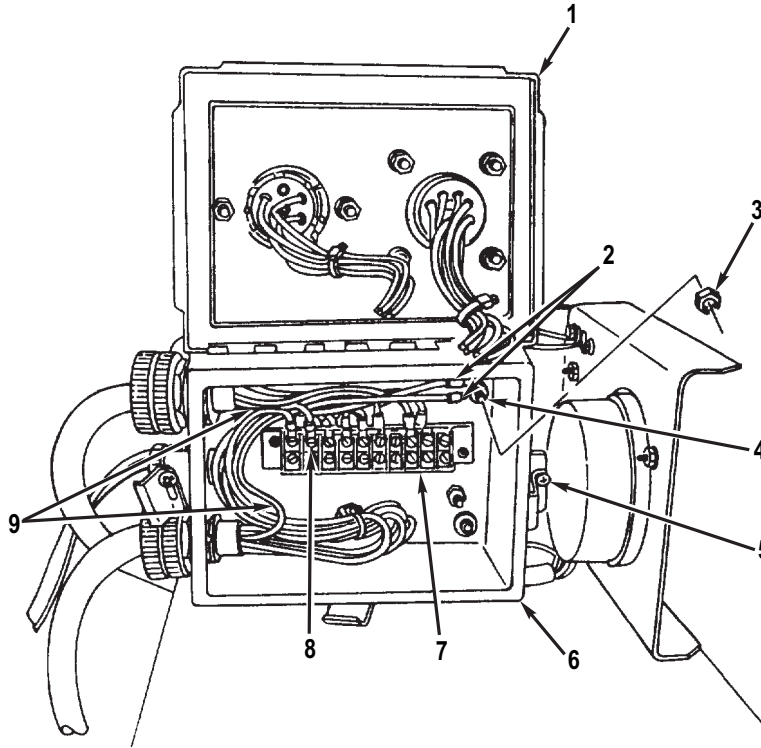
Rear Dolly Taillight Assembly Cable Assembly Retainers Removal.
